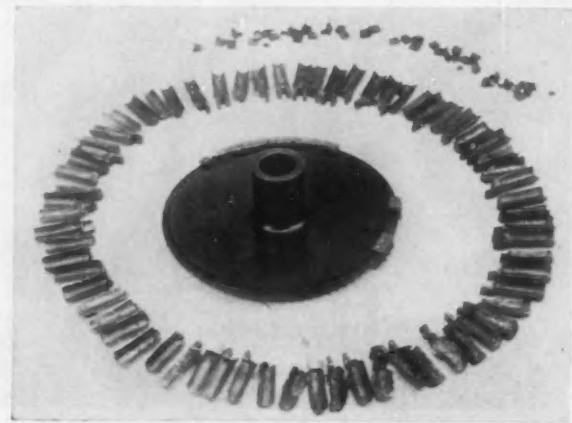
Turbine wheel after burst demonstrates frangible design.
